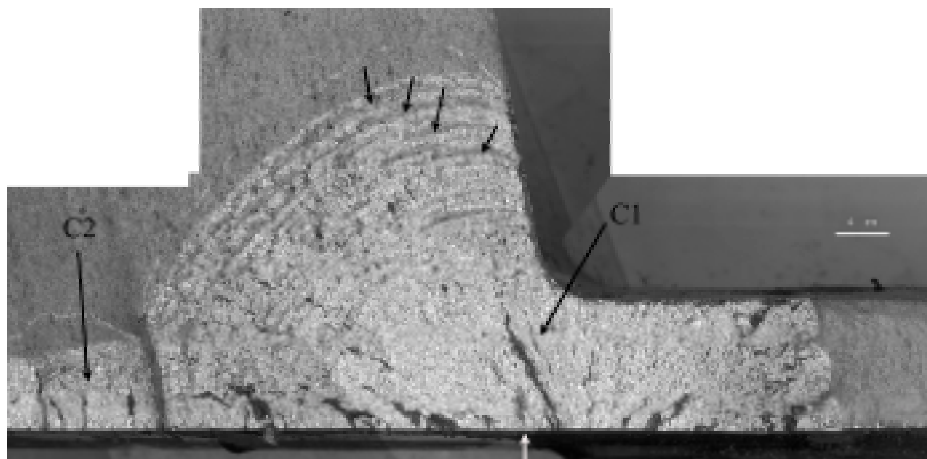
Fracture surface of the upper duct flange (right-hand side-RHS) in an F/A-18 bulkhead showing several tear bands (indicated by black arrows) and the crack origin was indicated by a white arrow at the bottom.
